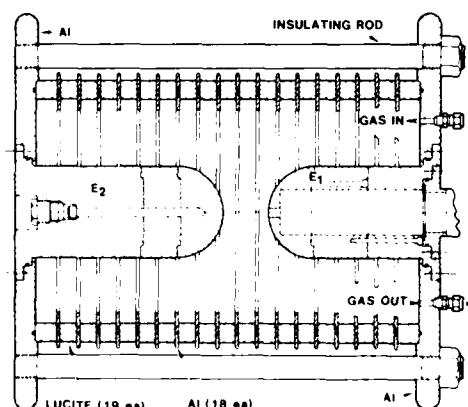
Crowbar housing used with IR and UV laser triggering
